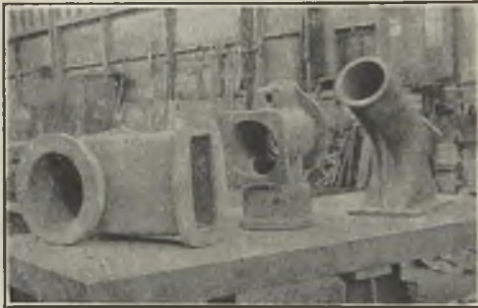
THESE CASTINGS HAVE BEEN CAST WITH GREEN SAND CORES.
